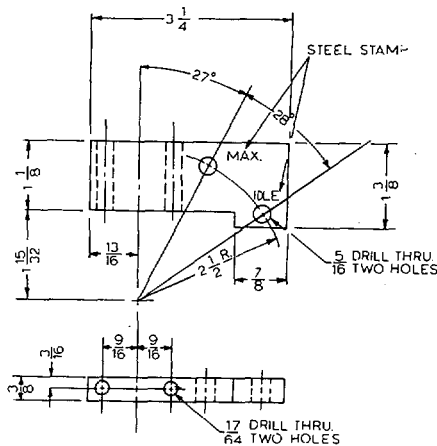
, F-5187.ST-1162 fuel pump throttle adjustment template
